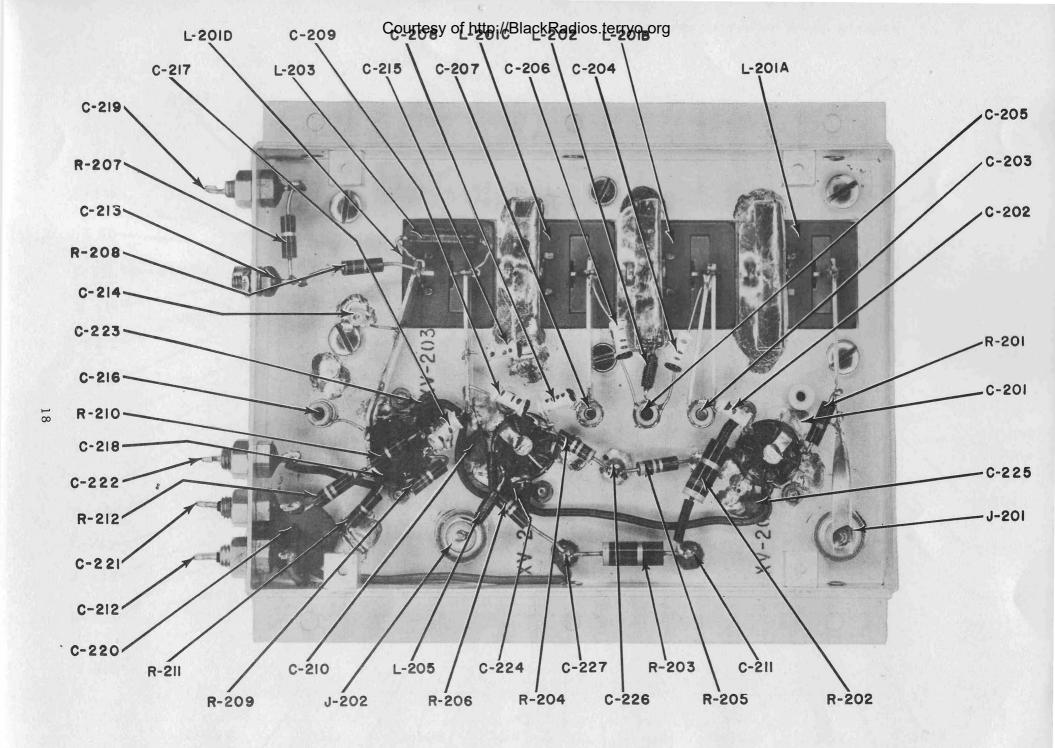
Tuner Chassis, Models 1672 and 1674 Special Purpose Receivers, Cover Removed.
